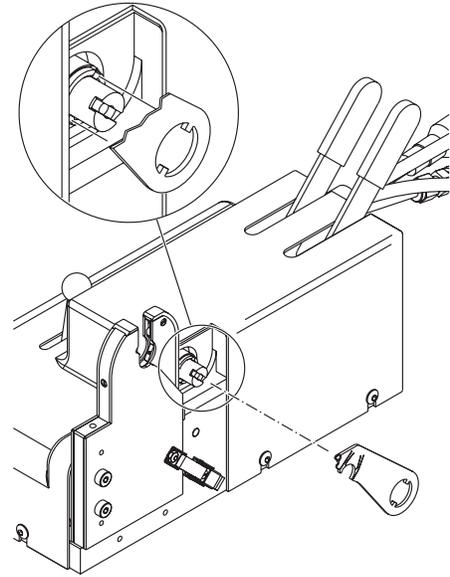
Aligning the Keyed Inner Clamp with the Notched Shaft
